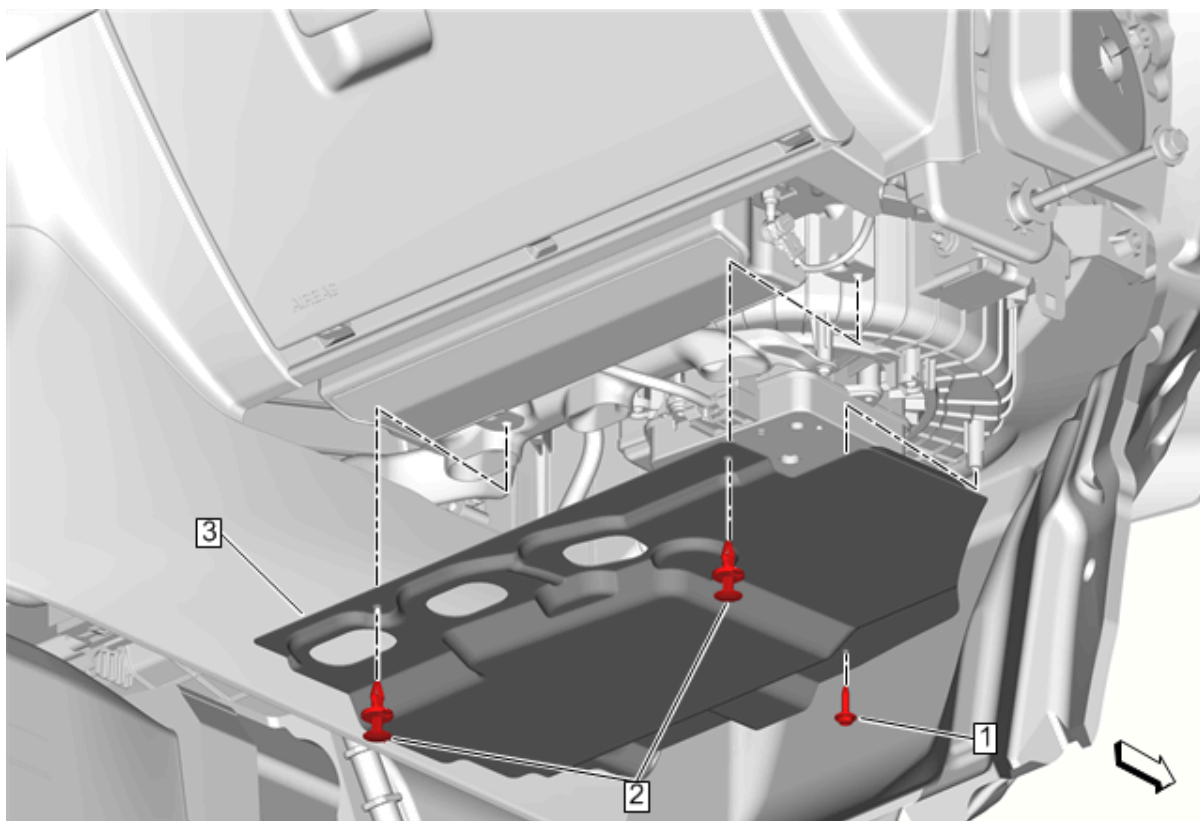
Instrument Panel Lower Trim Panel Insulator
